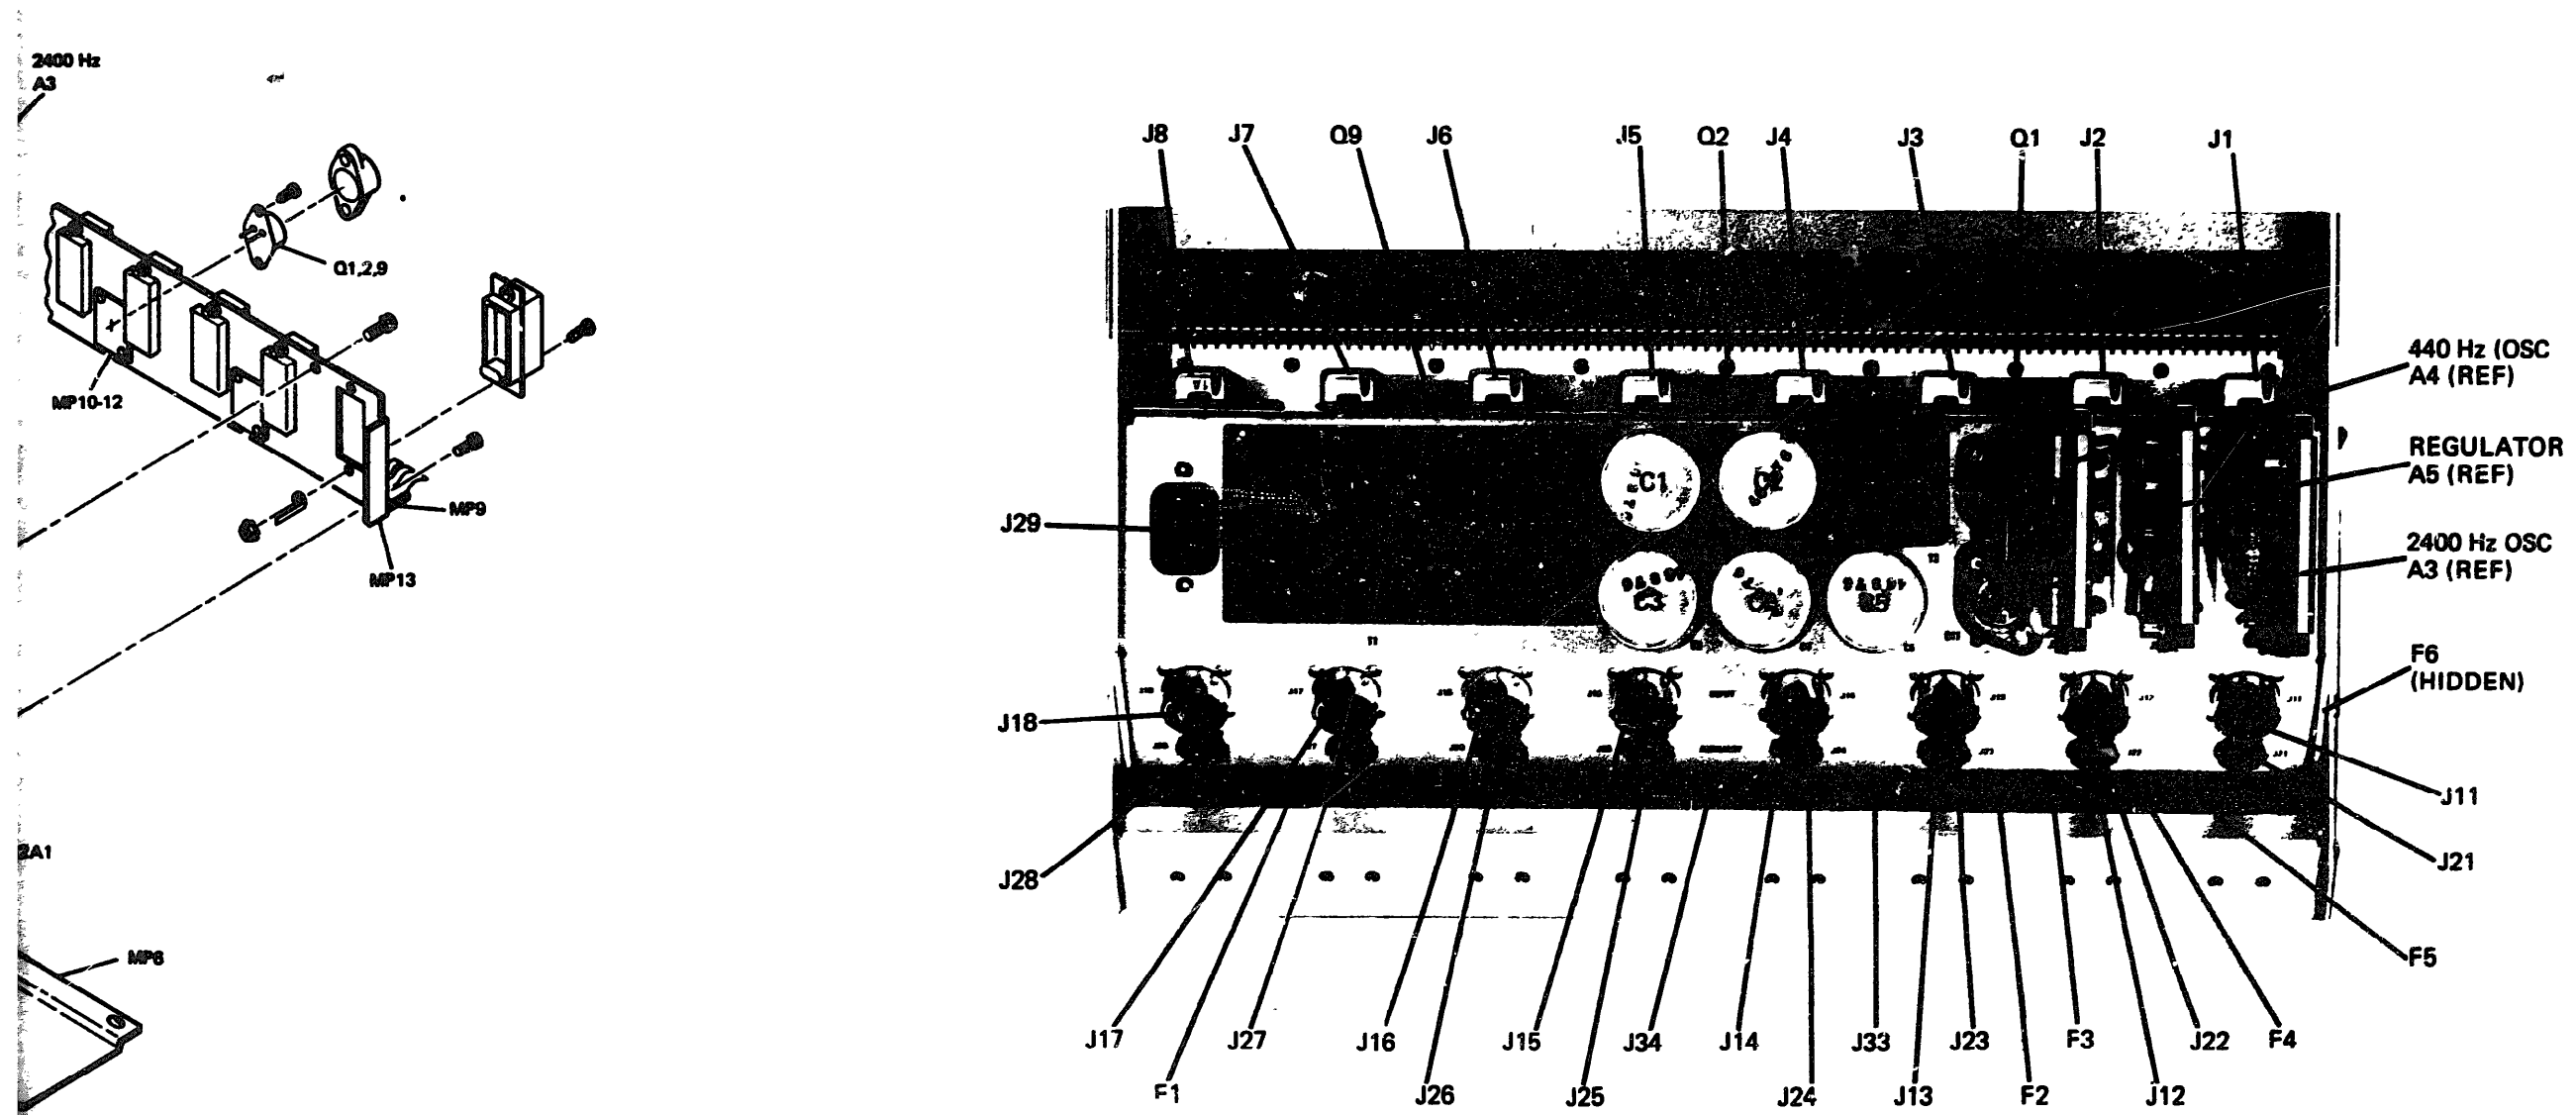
8848A Assembly A2, Power Chassis, Component Locations
